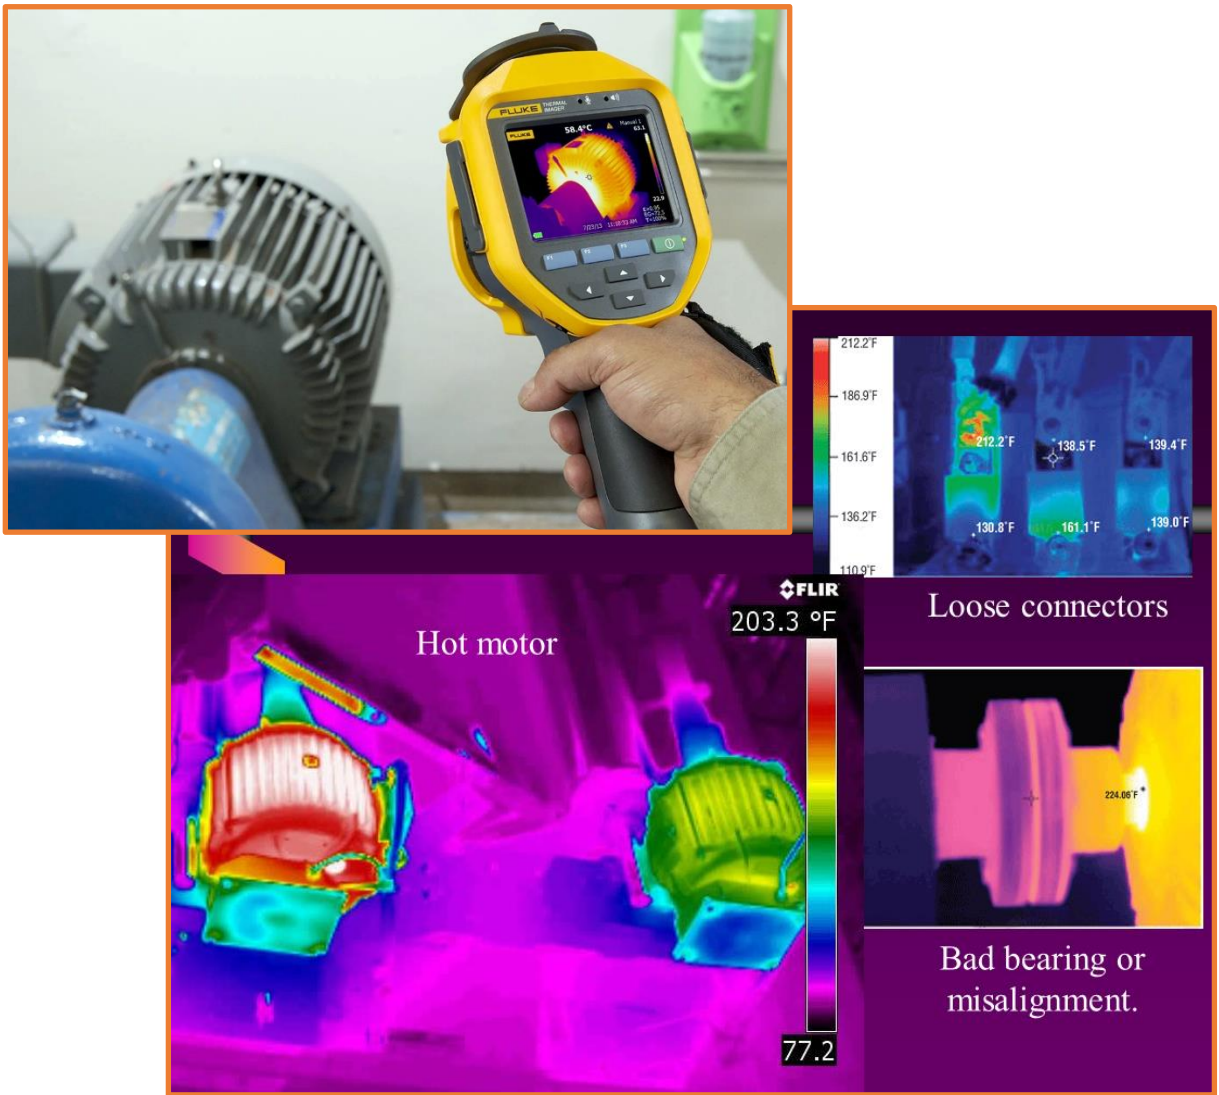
Infrared inspection shows hot motor, loose electrical connection, and hot bearing. [10] and Fluke Corp.
